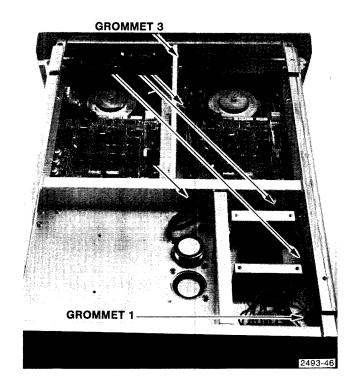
Threading ribbon cable D through grommets in cabinet chassis.
